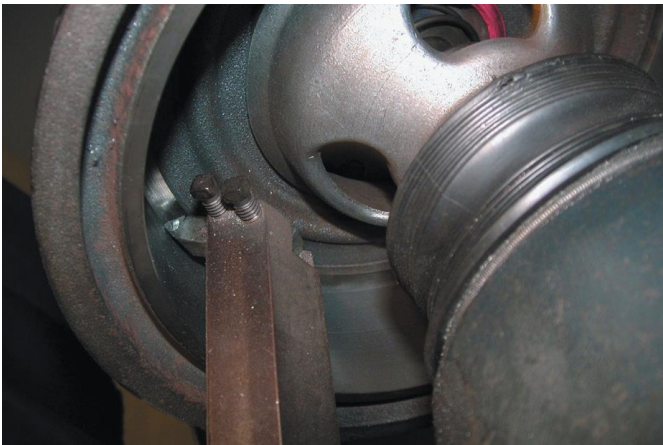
The drum will automatically move as the tool remains stationary to make the cut.
